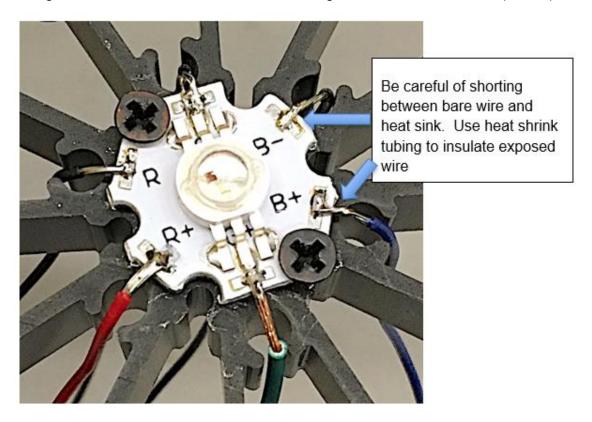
Completed LED/Heatsink assembly. Note: Screws are not touching solder or wires and wires are not touching the heat skink. (heat shrink protection not shown)
